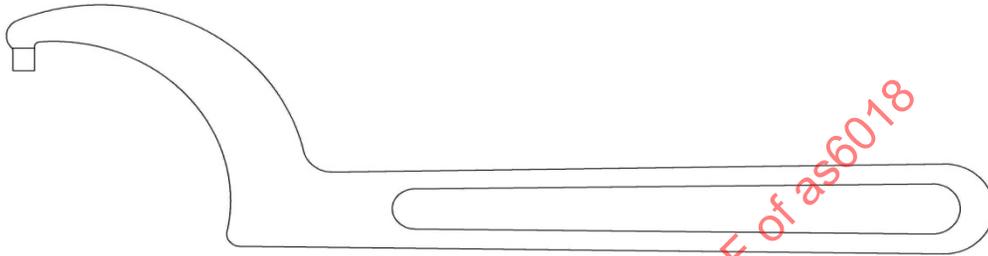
TYPE II, CLASS 1, NON-ADJUSTABLE PIN SPANNER WRENCHES
